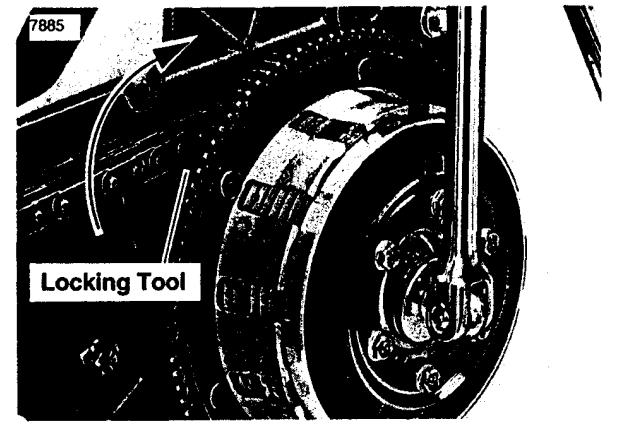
Removing Clutch Hub Mainshaft Nut
